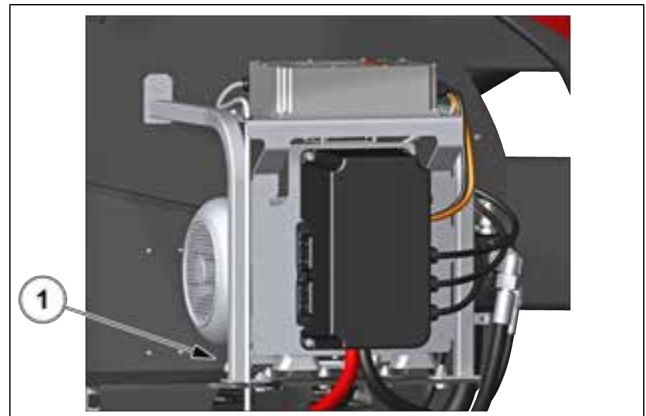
Checking the emergency controls from the platform - up to machine No. MAN00000J01101633
